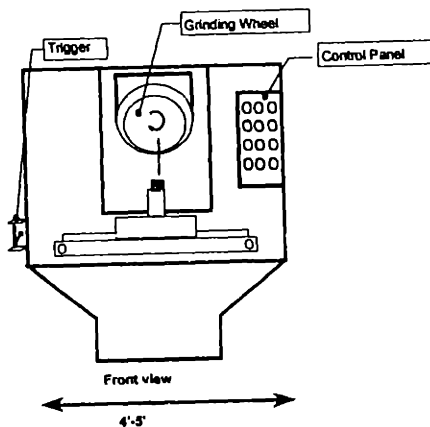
Blade Grinder Machine designed to achieve minimum takt time
